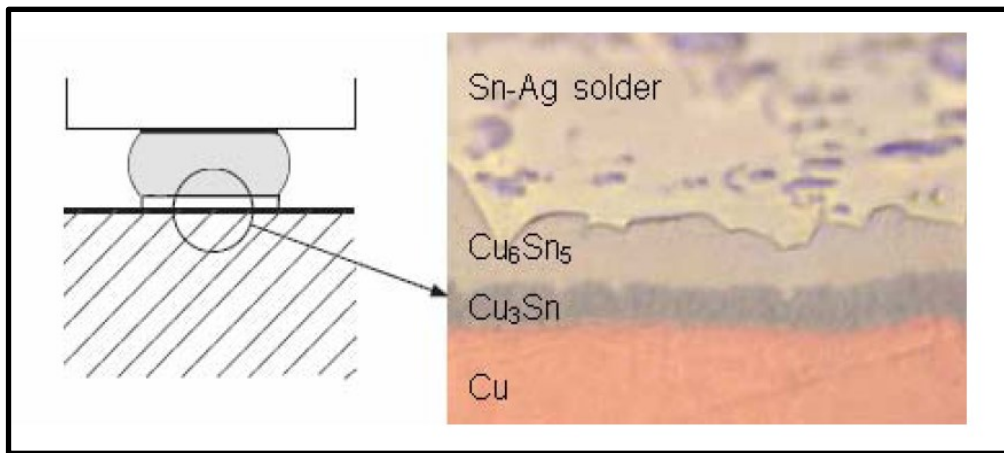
Pb-Free SAC Alloy Solder Joint of BGA Package [17]
